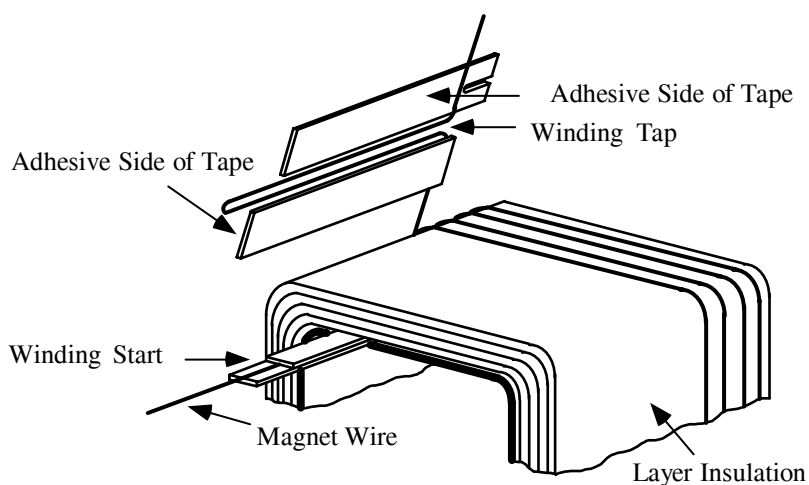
Tap Lead: Step 1, Showing the Exploded View.
